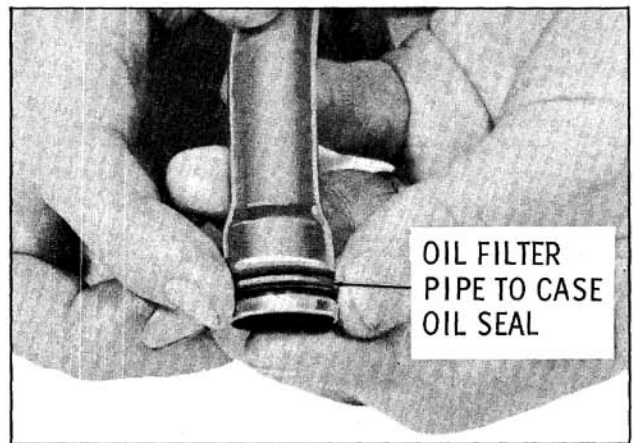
Oil Filter Pipe to Case Oil Seal
